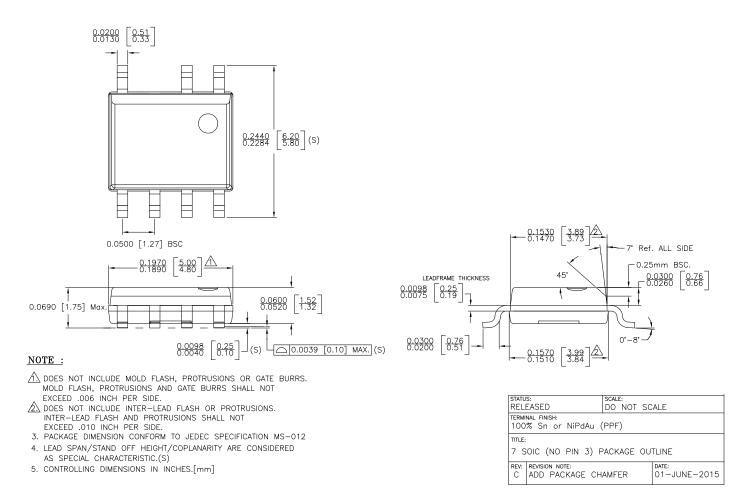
7-Lead SOIC Package Outline Drawing
